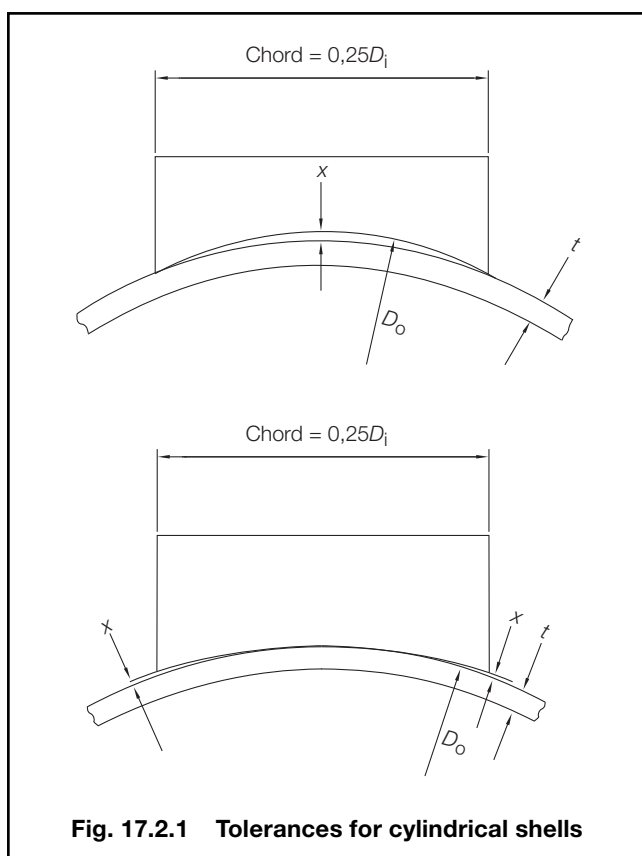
Tolerances for cylindrical shells
